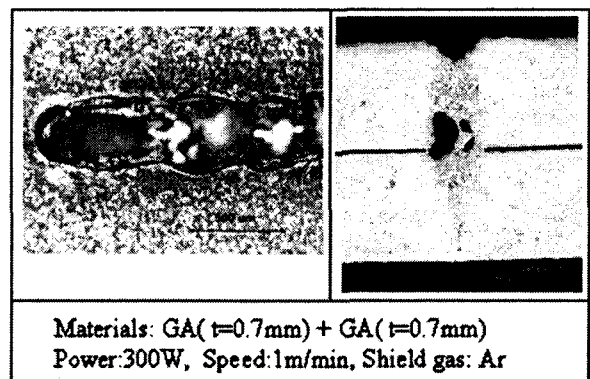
Top surface & Cross sections of bead in lap welding
